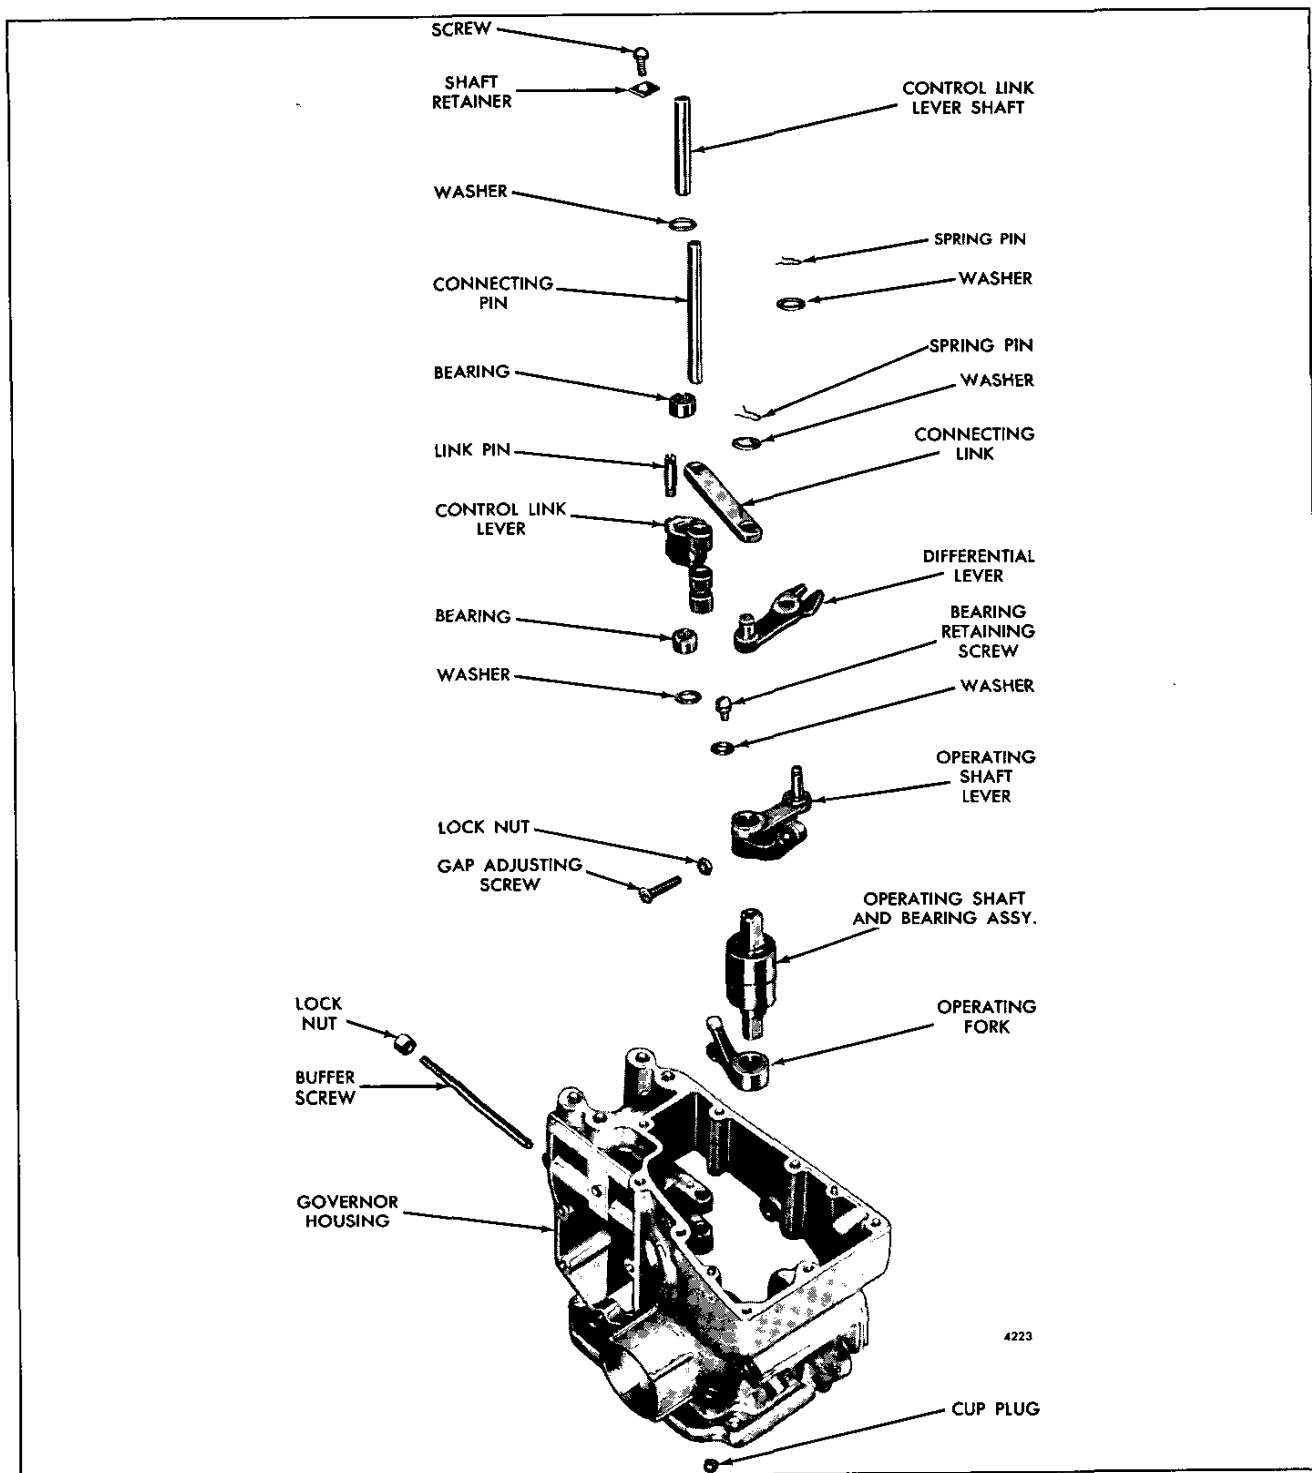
Governor Housing and Operating Shaft Details and Relative Location of Parts
